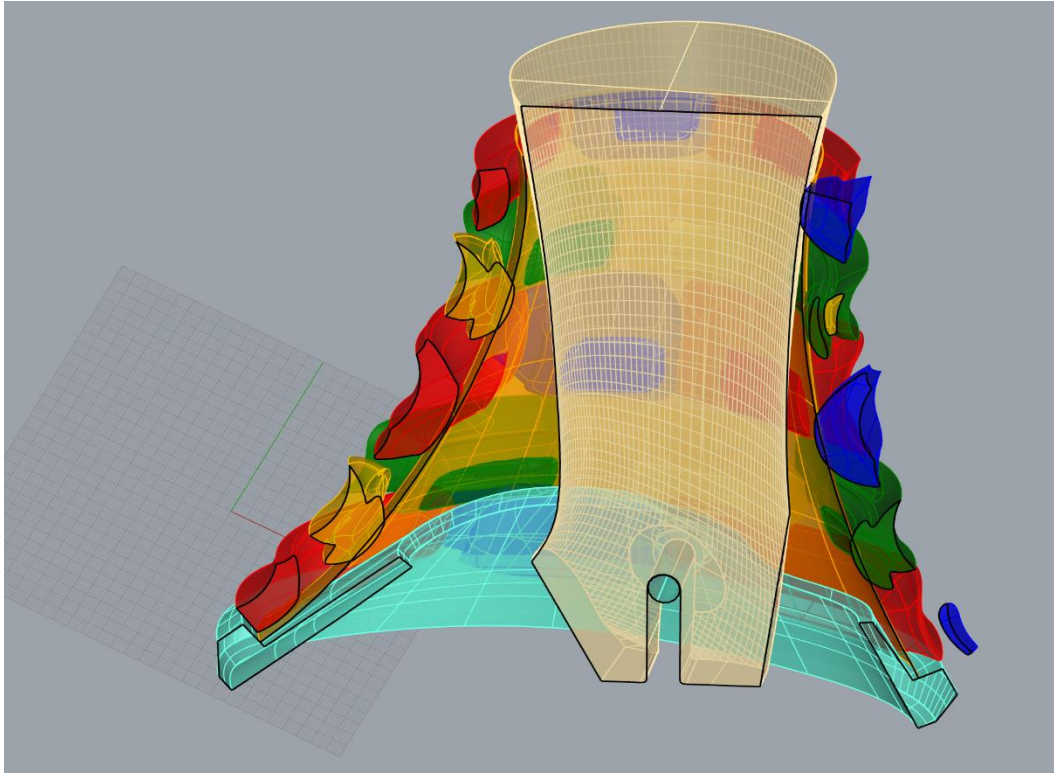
Section view showing the two-part test fixture, consisting of a base part (colored cyan) with a cylindrical beam for a revolute joint, and a rigid “leg” (colored pale yellow) with a mating surface for the revolute joint, as well as an extruded cut allowing the simulated leg to be removed upwards through the top of the cylinder-like protective surface or placed back on the joint through the surface (thus, the protective surface did not have to be split into two parts and assembled on the “leg”, which would have made manufacturing the protective surface much more difficult).
